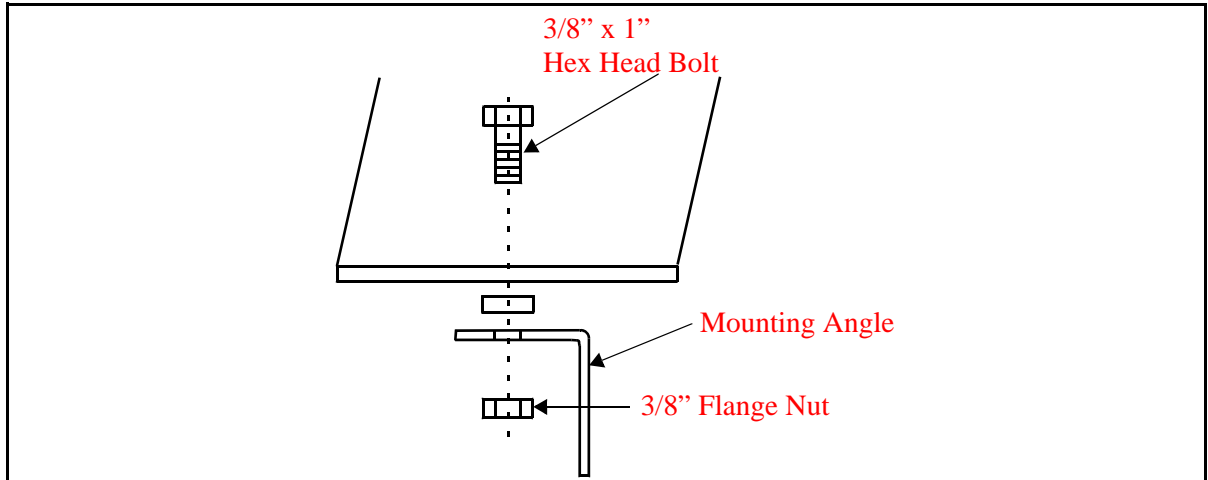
Attach Mounting Angle to Bottom Flanges
